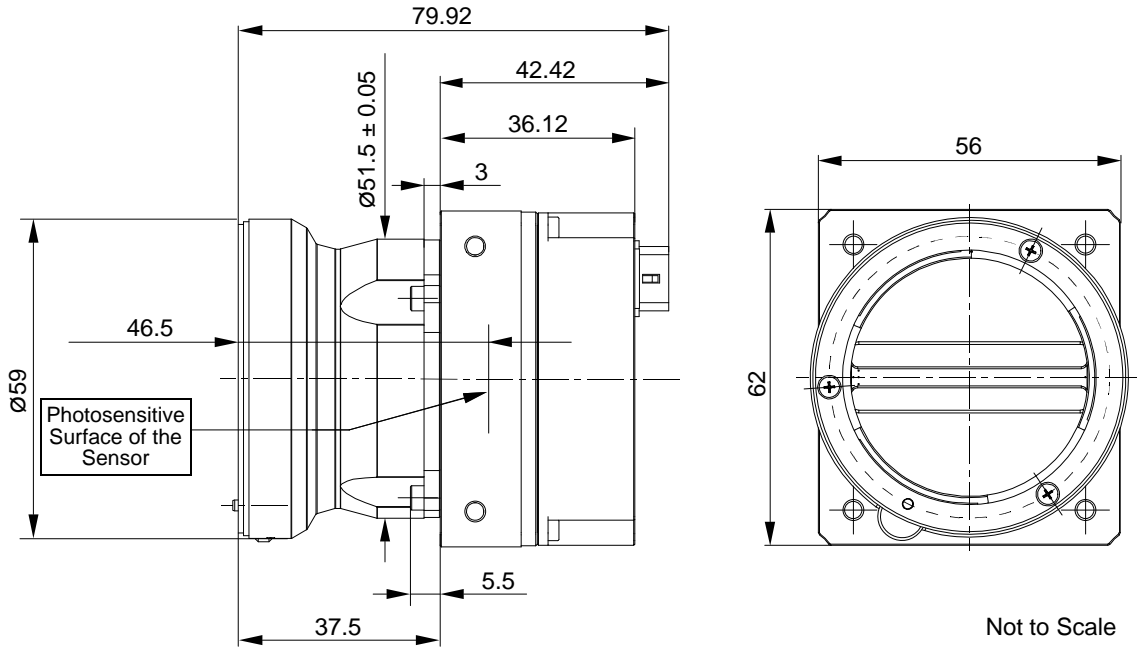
F-Mount Adapter on a racer GigE Camera; Dimensions in mm
